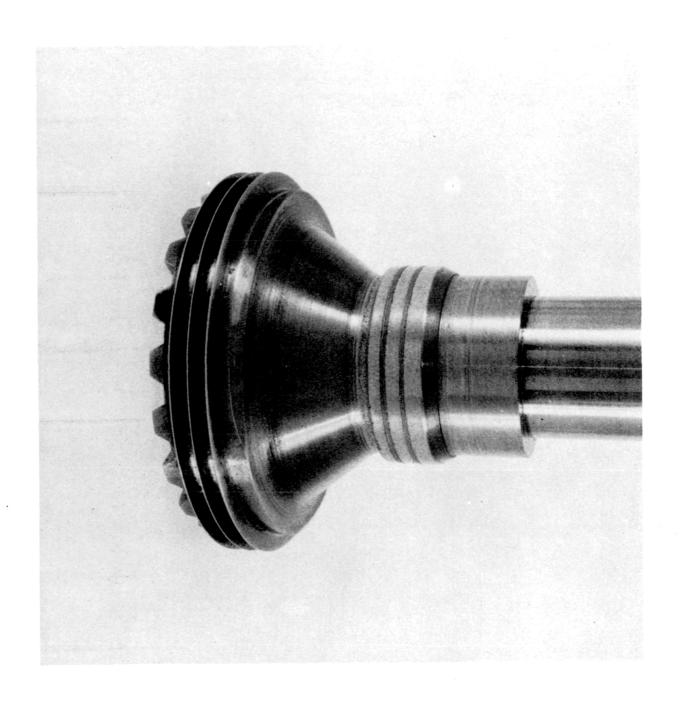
NASA 6:1 Compressor Test Rig, Inducer Failure, Turbine Shaft Seal Rub SKP25641-1.
